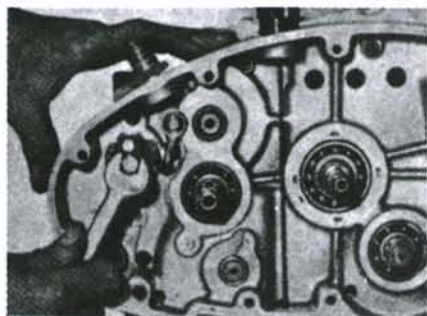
The shift drum rotor should be removed before separating crankcase halves.
